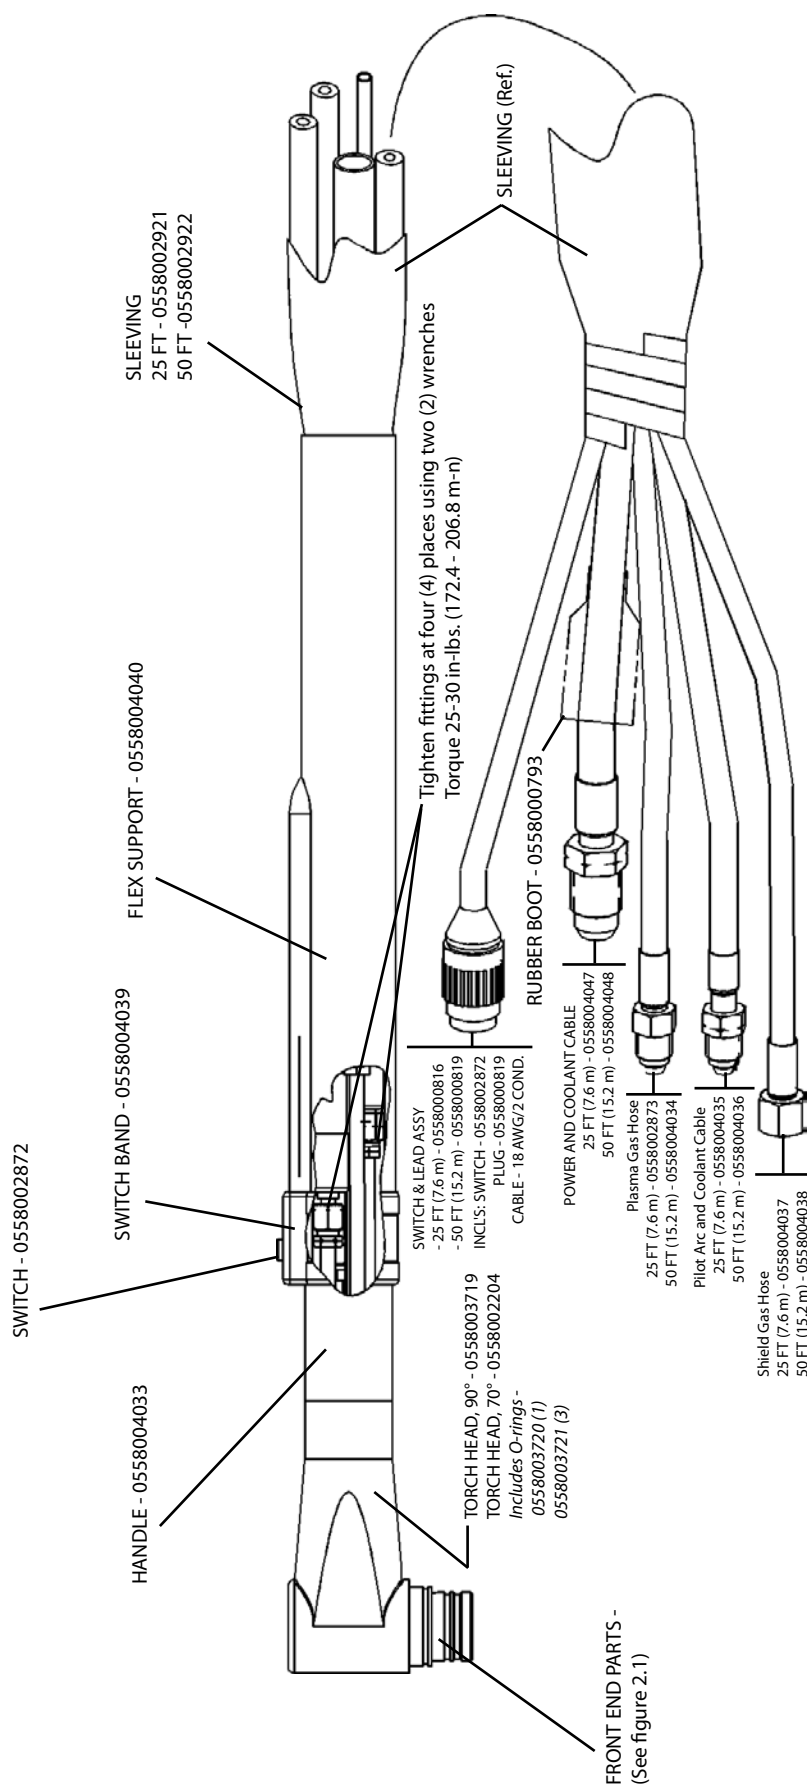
Replacement Parts - PT-26 Torch Assembly
